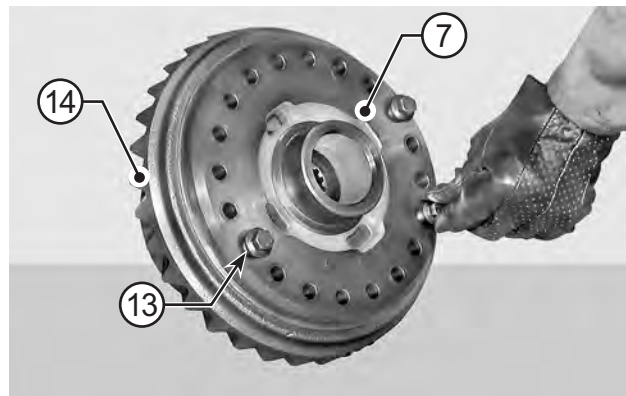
Mount the ring gear (14) and fasten it to the differential box (7) with screws (13) tightened provisionally by hand.
